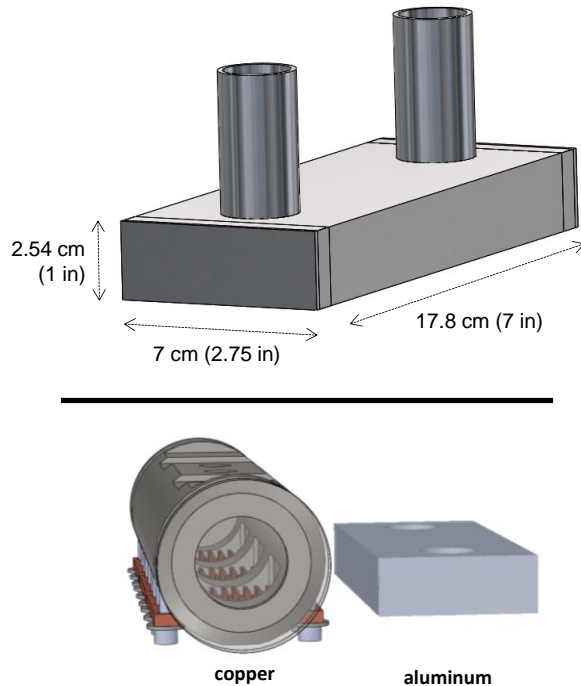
CAD drawing of the advanced evaporator design with dimensions (top) and a side-by-side size comparison of the advanced evaporator design and the initial, copper cold plate design.
